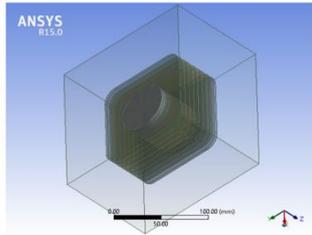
3D geometry of IC engine and enclosure without holes on fins
